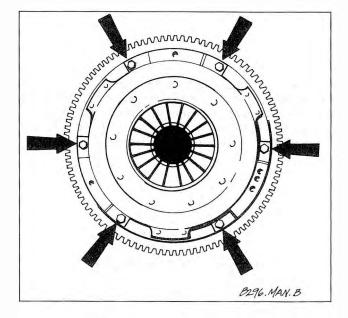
Pressure plate bolts (arrows) to be removed for clutch removal.
